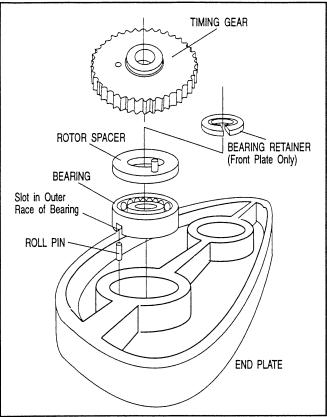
End Plate, Bearing, Spacer, Retainer and Timing Gear Alignment Detail
